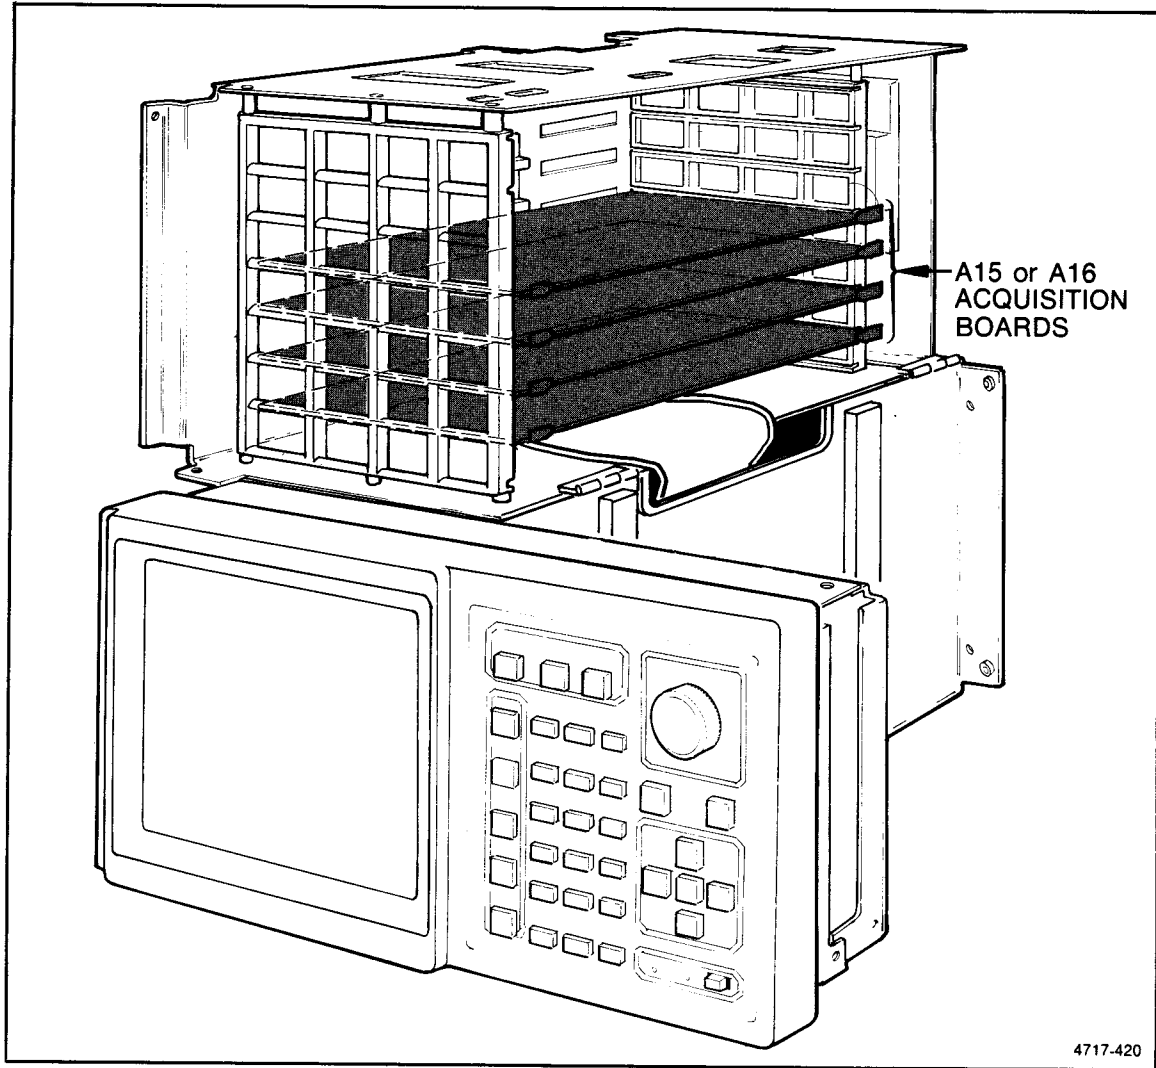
A16 18-Channel Acquisition Board Card Cage Locations.
